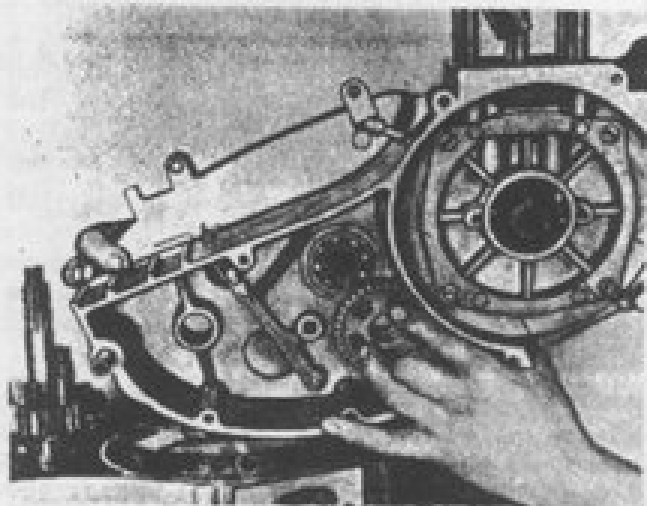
Joining the crankcase halves, HJK-10-3 motorcycle.
